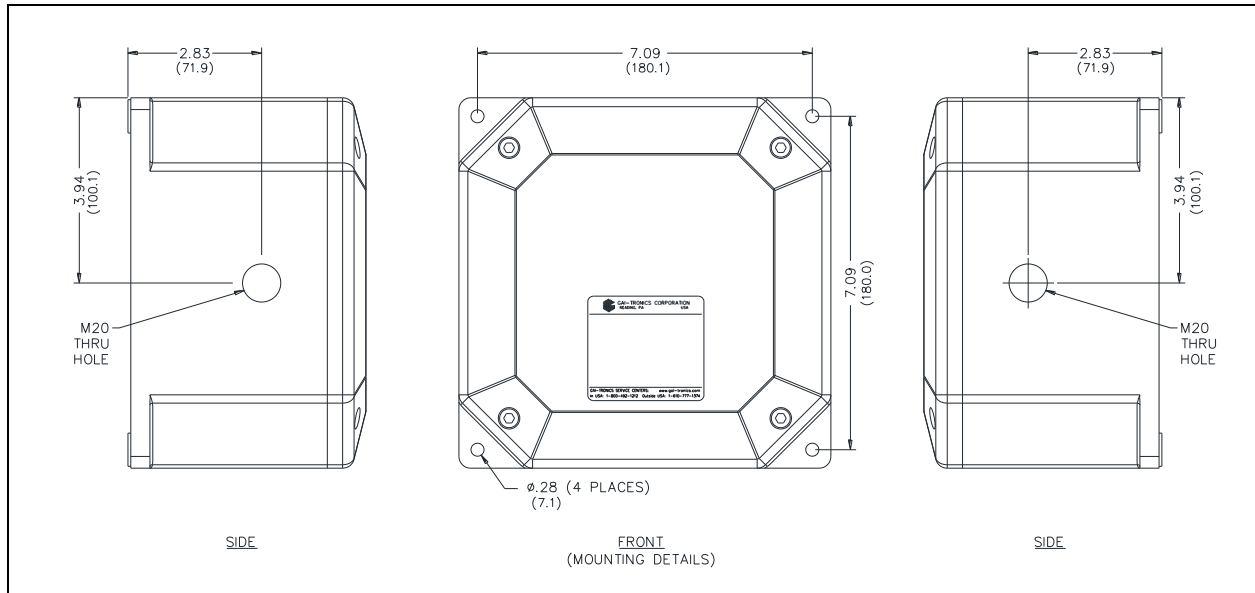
Model 10438-101 Microphone I.S. Barrier Kit Mounting Details
